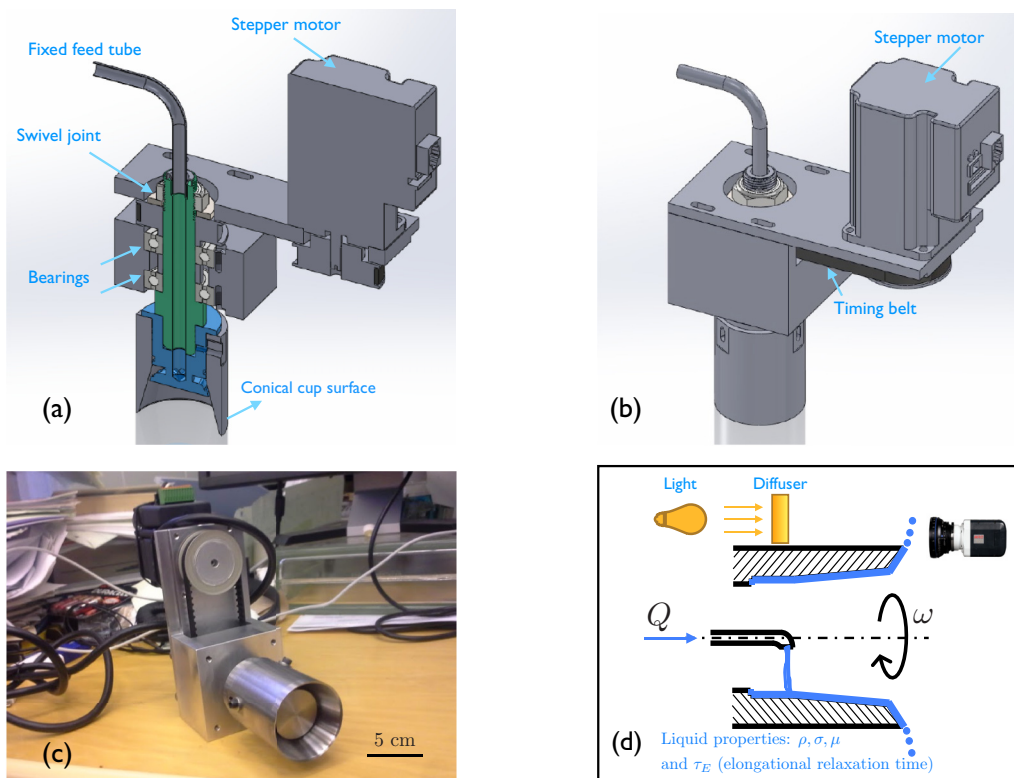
(a, b) Solidworks CAD drawings of the initial design for the rotary atomizer. (c) The final assembled prototype. (d) Schematic diagram of the visualization setup. A cup with outer diameter $D = 2R = 3.18$ cm, rotating at an angular speed ω , is supplied with a liquid at a volumetric flow rate Q . As a result of centrifugal forces, the liquid is pushed axially and radially outwards to the rim of the cup and forms a toroidal ridge of fluid which then disintegrates into smaller fragments. A high-speed camera (Phantom-Miro) is used to visualize the fragmentation process.
